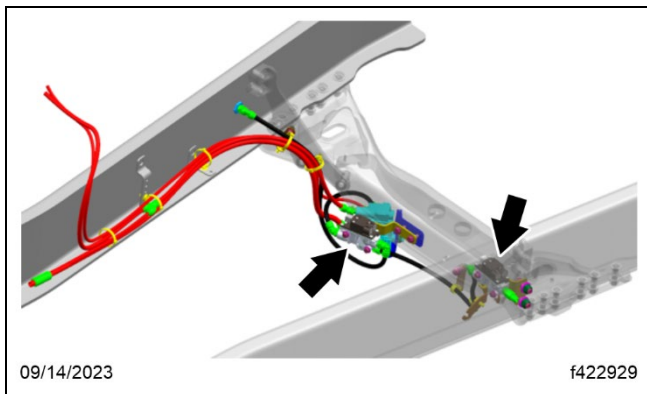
, Modulator Valve Mounting Inside the Frame Rails
